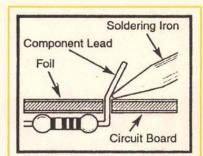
Push the soldering iron tip against both the component lead and the circuit board foil.
